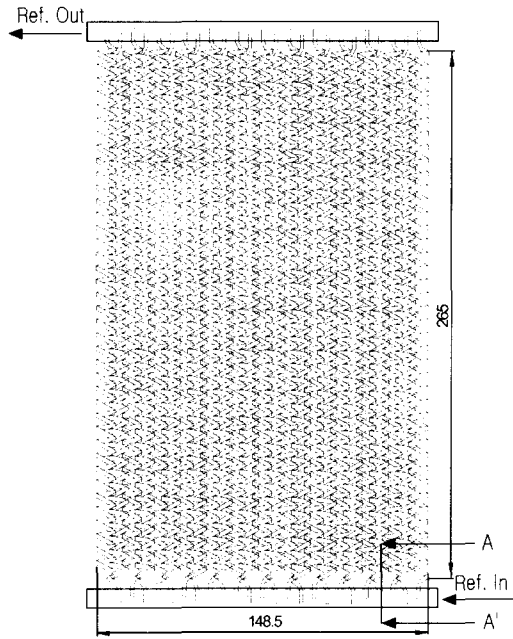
Schematic diagram of the helically coiled tube heat exchanger
